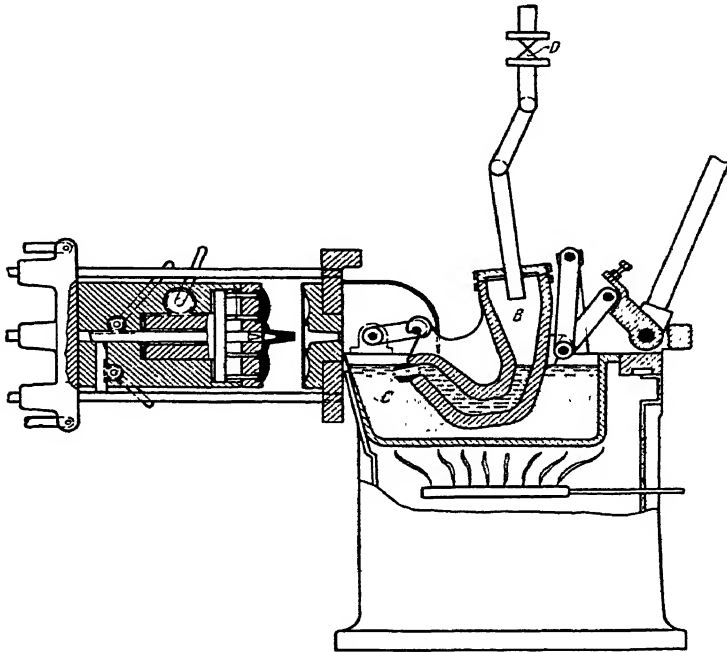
TYPICAL GOOSENECK MACHINE SHOWING FILLING POSITION OF GOOSENECK.
